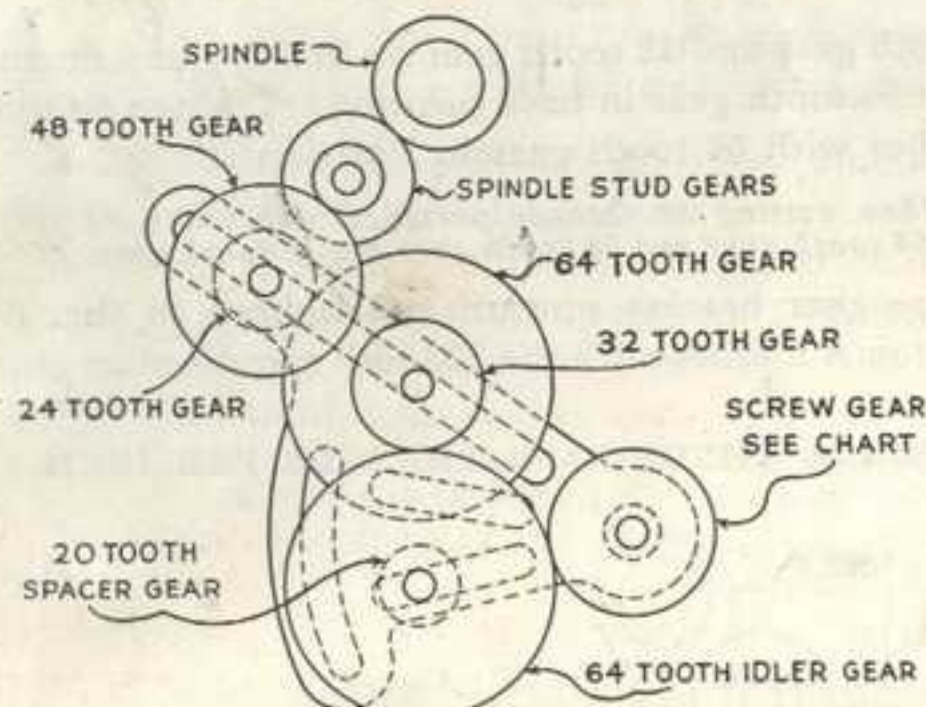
Gear set-up for 72 and 80 threads per inch.
